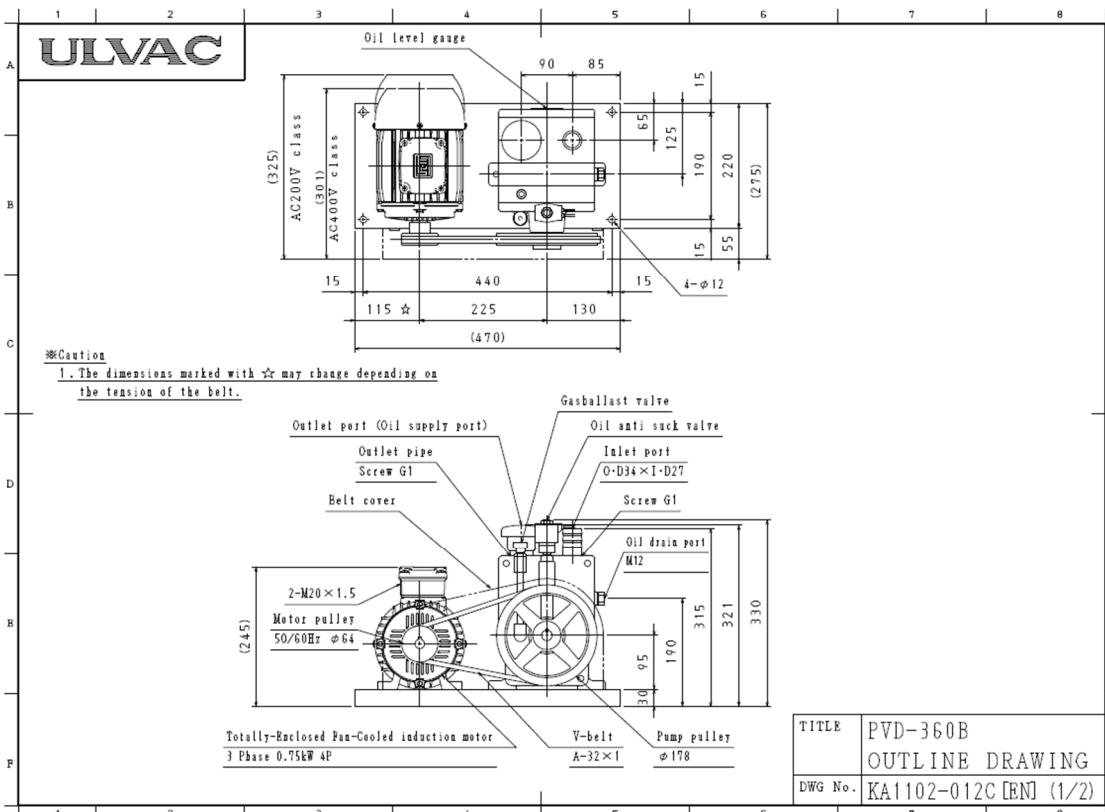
Dimensional drawing PVD-360B, PVD-360B-K
